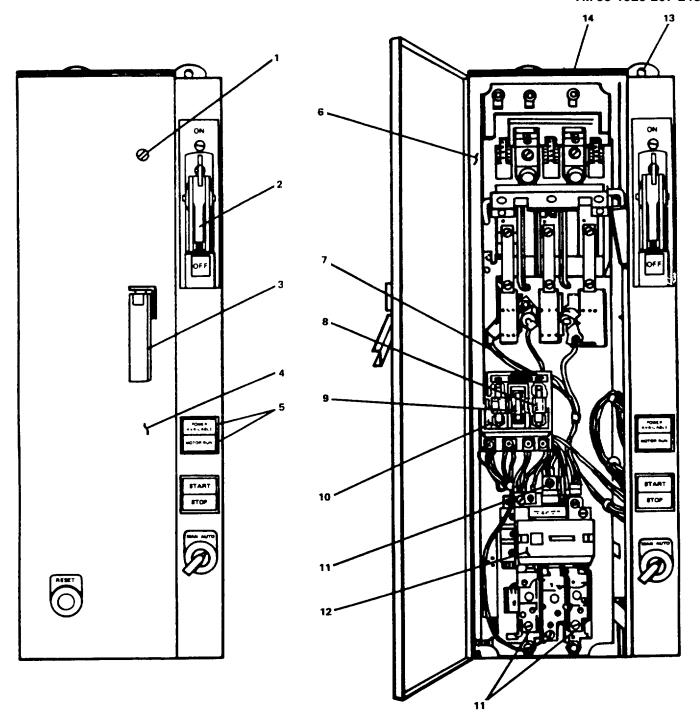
Motor Controller (Bilge and Ballast Pump).
